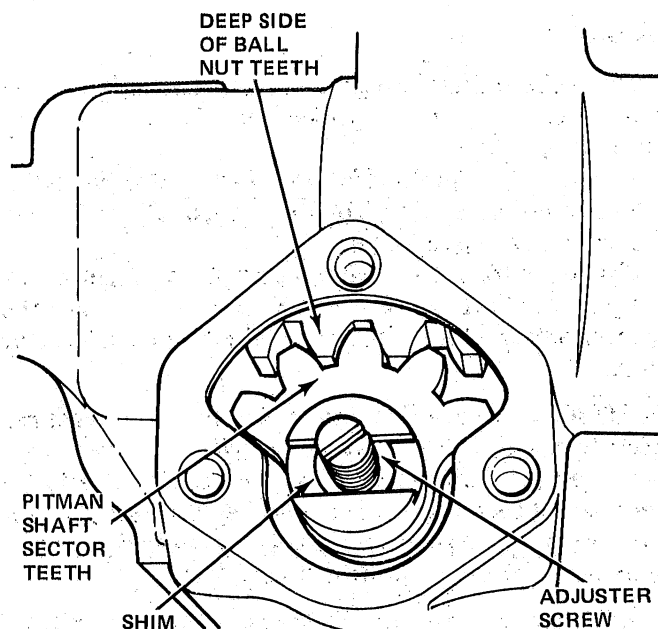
K-15 Pitman Shaft and Ball Nut In Centered Position
